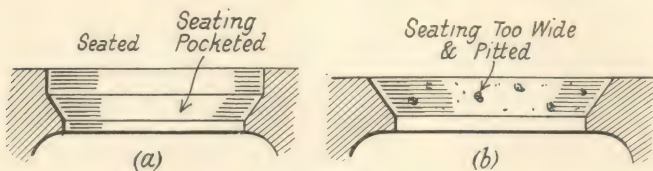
TYPICAL VALVE SEATING DEFECTS
